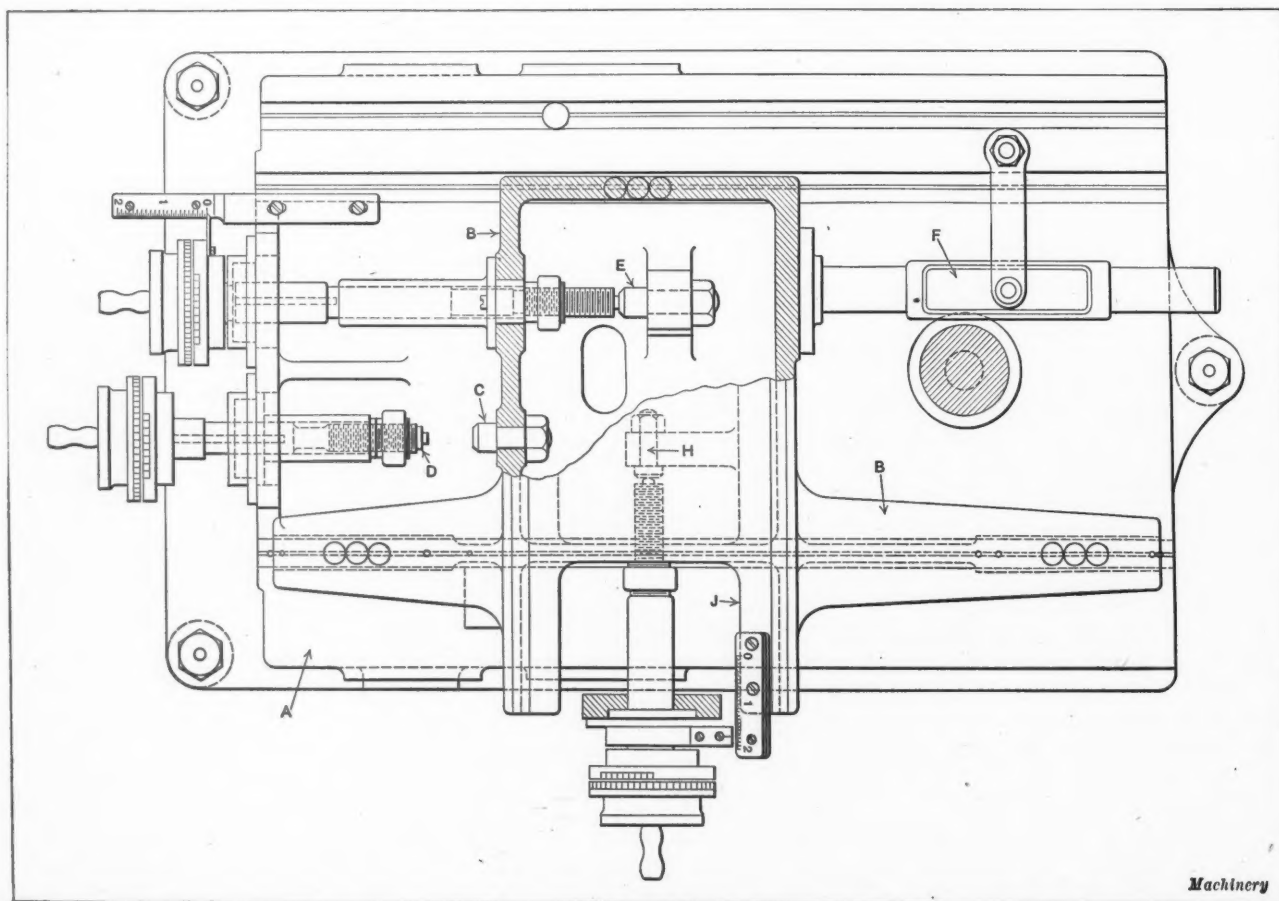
View of Gaging Machine with Desk removed, showing Traveling Carriages and Micrometers used on Vertical Projector
